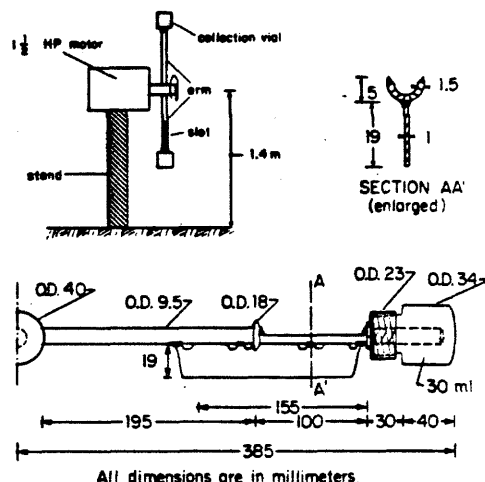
Caltech rotating arm collector. Full welds attaching the fin to the rod are shown in dark.
